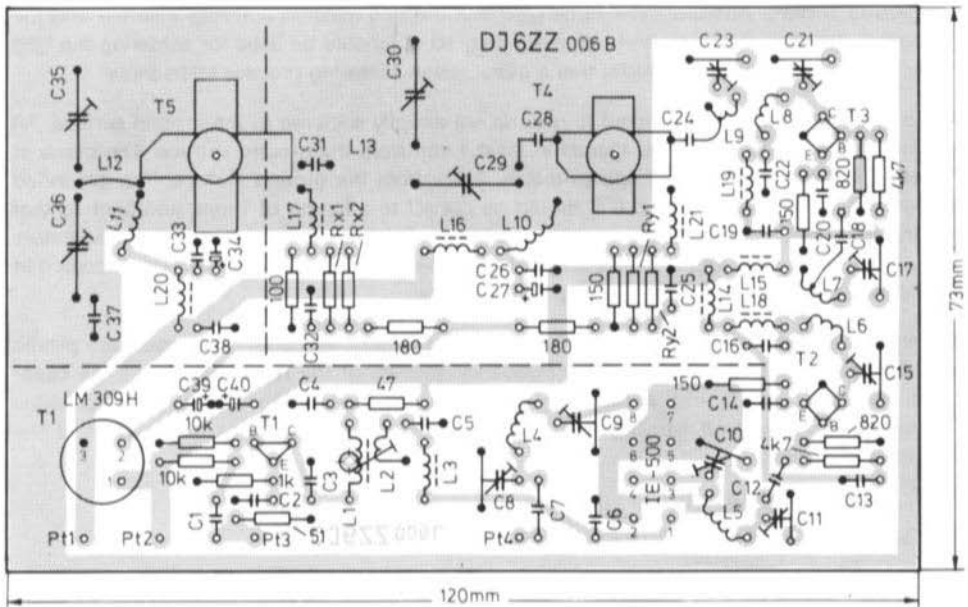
Component locations and conductor lanes on the lower side of PC-board DJ 6 ZZ 006
